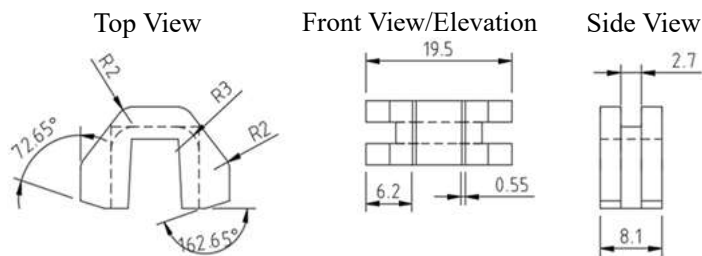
Geometric dimensions of vibration-damping rollers (all sizes in mm)
